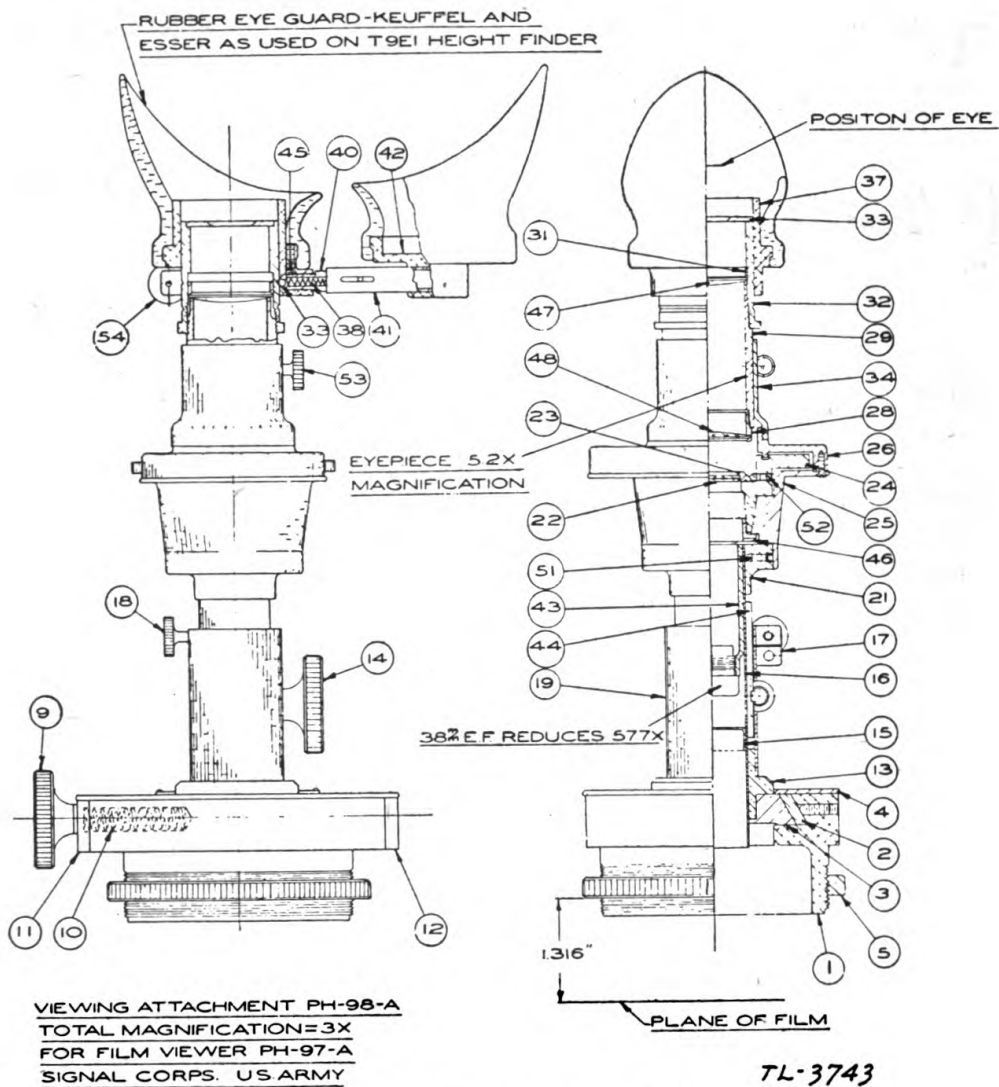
Parts identification for viewing attachment PH-98-A.
